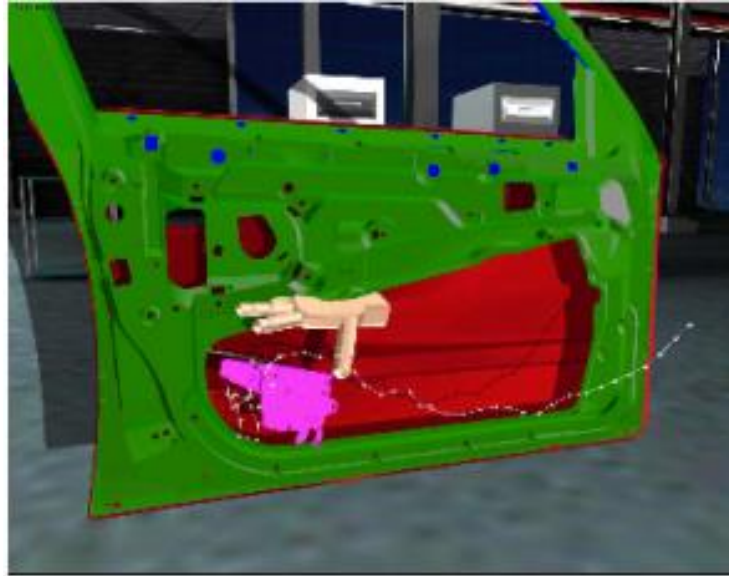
Augmented view of a BMW car door and locking mechanism [22]
